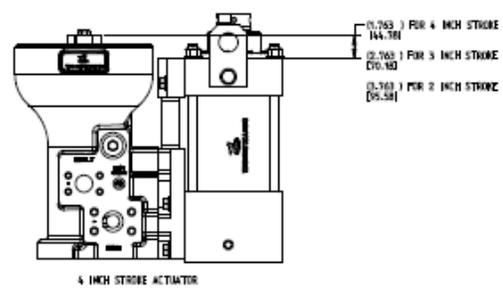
V45TD-15XX Integrated Installation Dimensions
